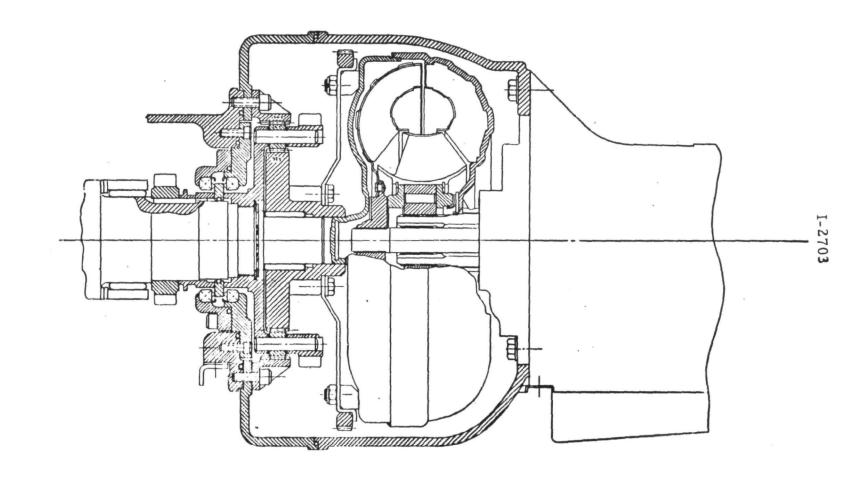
Layout of Torque Converter and Overdrive Gear for Transmission (12" diameter torque converter).
